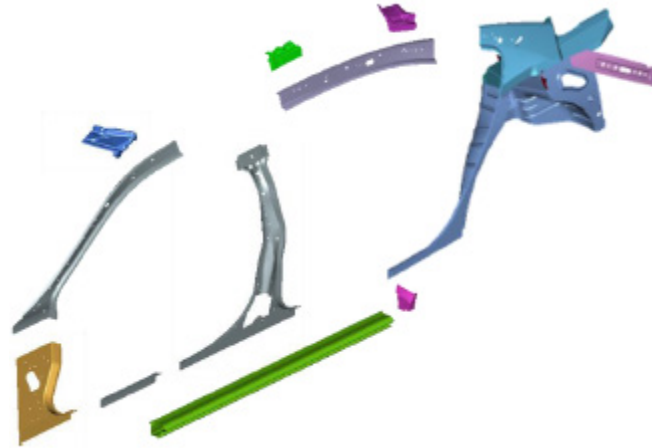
Inner body side inner subassembly of the laser welded structure
